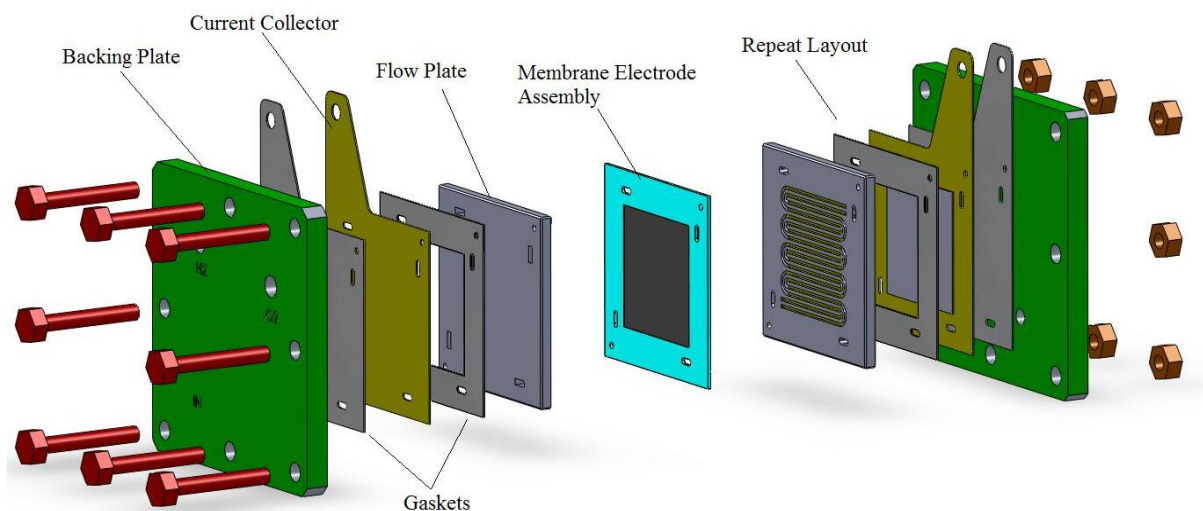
Proton Exchange Membrane (PEM) fuel cell model (exploded view).
